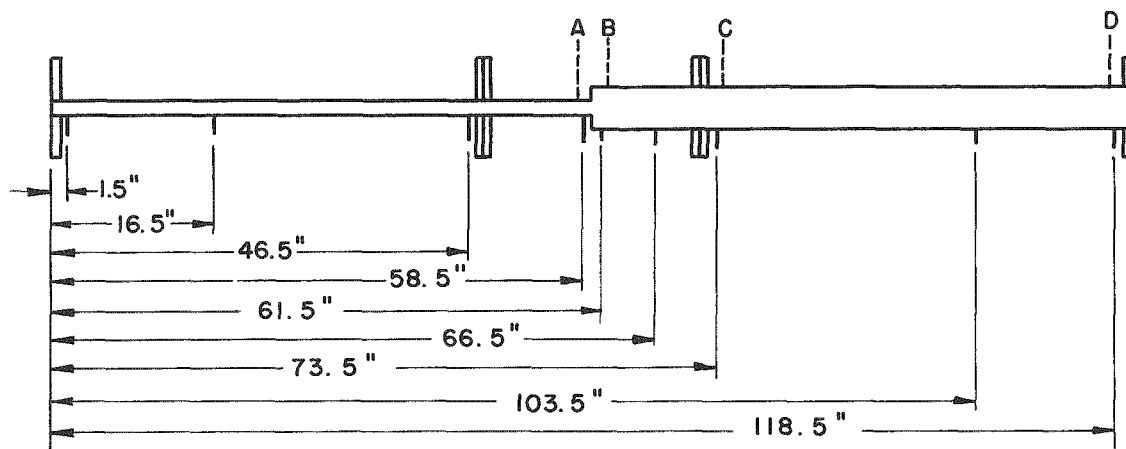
Pressure Tap Locations in Expansion Test Section Assembly
